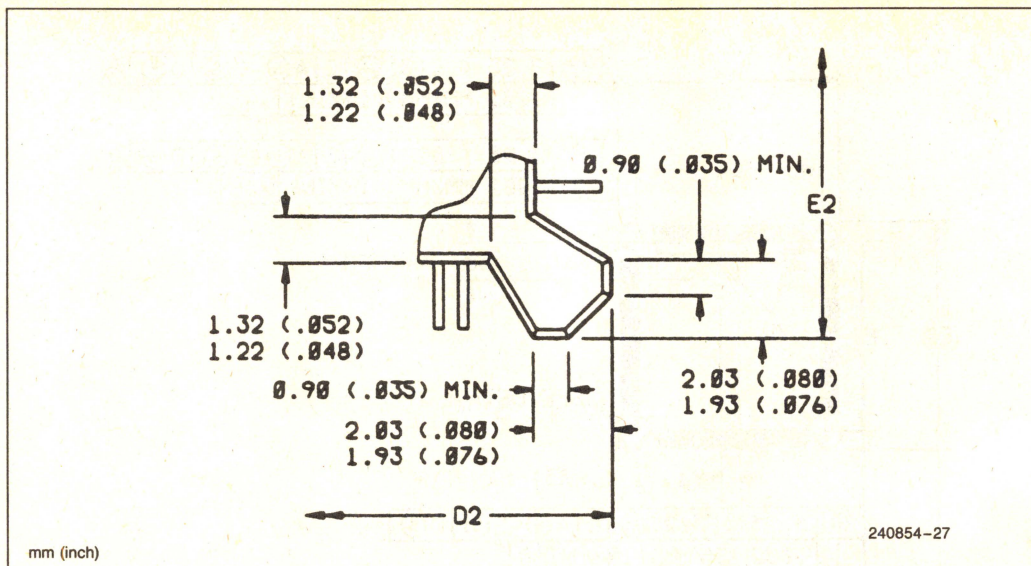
132-Lead PQFP Mechanical Package Detail—Protective Bumper
